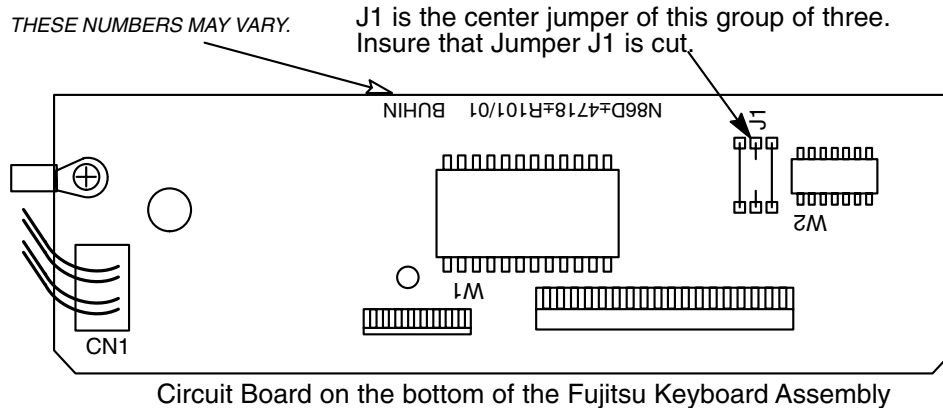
Fujitsu Keyboard Assembly Circuit Board
